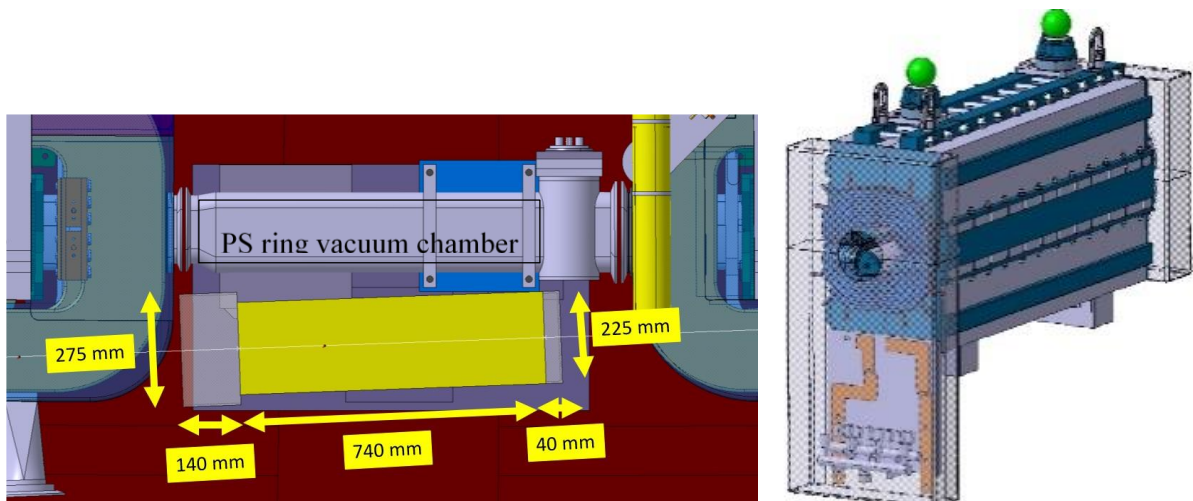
Left: top view of Q74 maximum overall dimensions; right: new Q120 C 3D CAD view.
